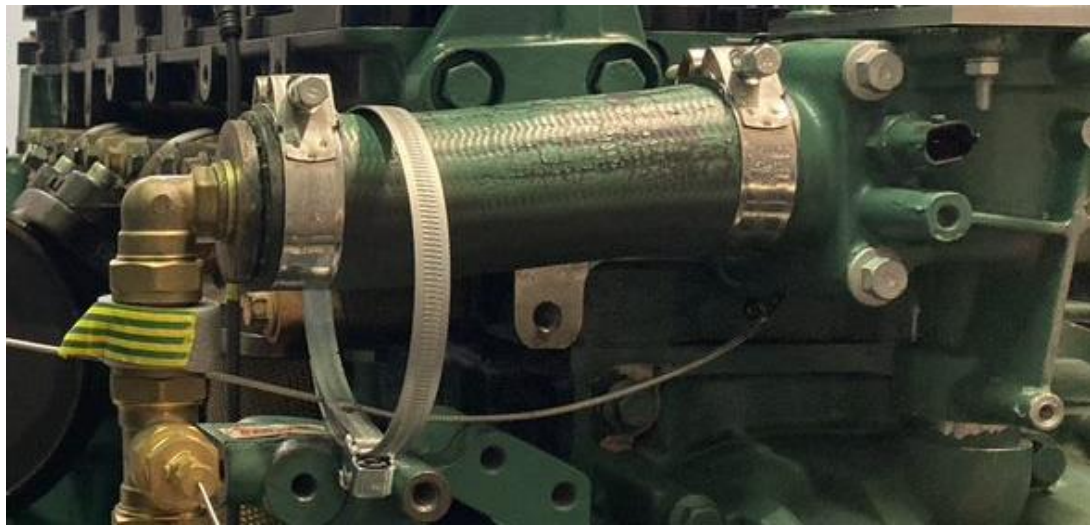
22 mm copper pipework elbow, connected to the existing coolant outlet for the engine.
